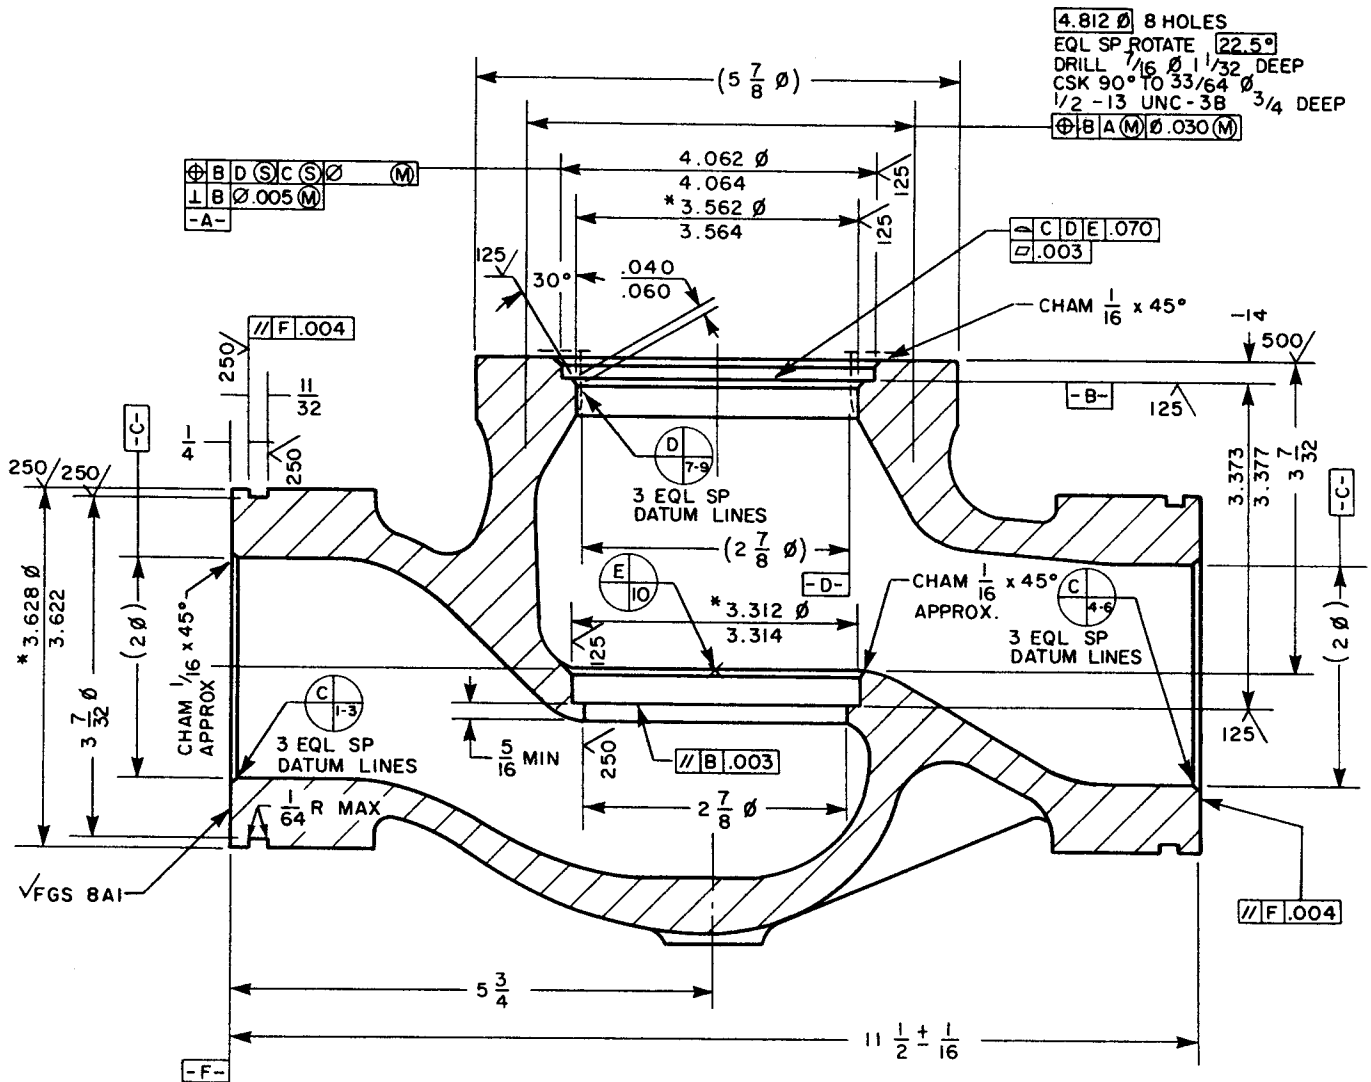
Machine drawing for valve in Fig. 2 (dimensions in inches, conversion: 1 in. = 25.4 mm).
